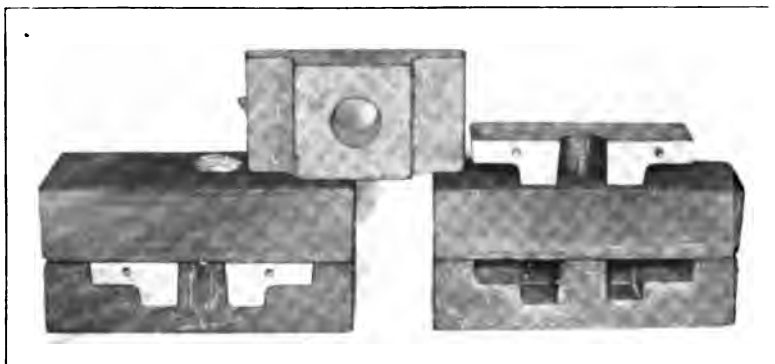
FINISHED PATTERN, WITH SECTIONAL MOLD, AND CASTING.
